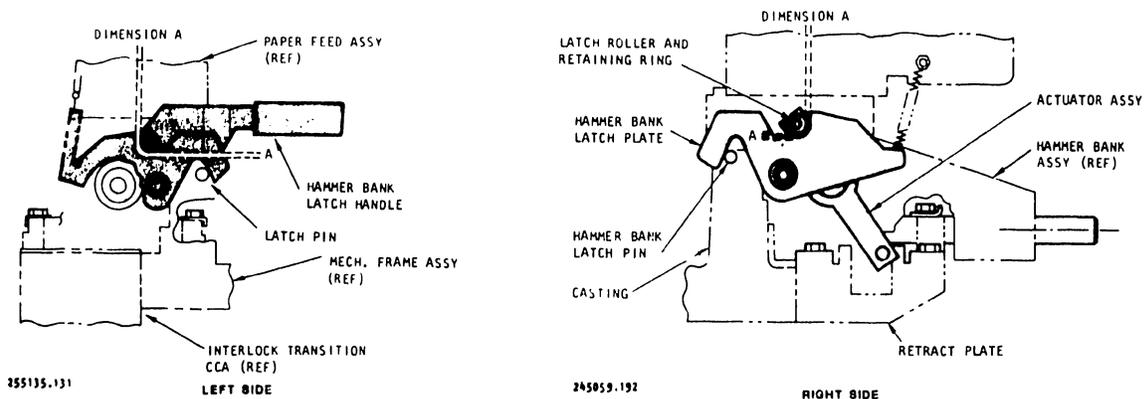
Hammer Bank Latch and Pin Assembly Adjustment
